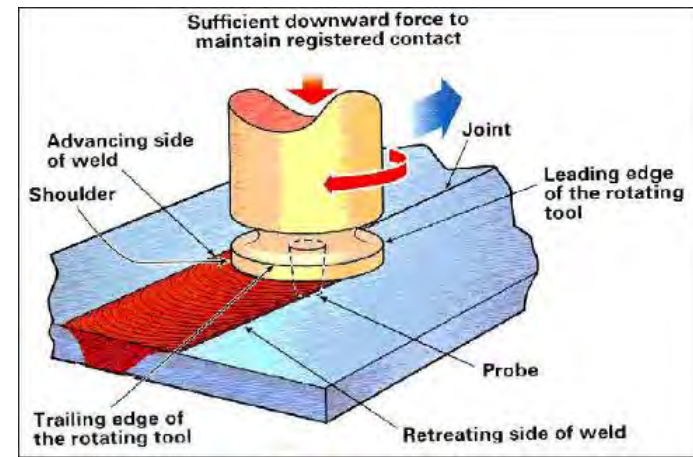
Typical butt joint being created by friction stir welding.
